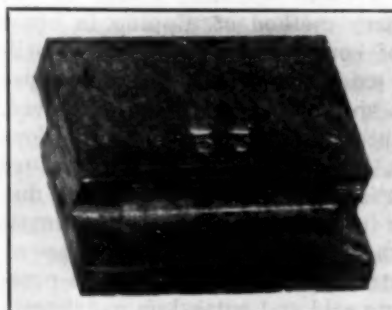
SHEAR SPECIMEN AFTER BRAZING AND BEFORE MACHINING
